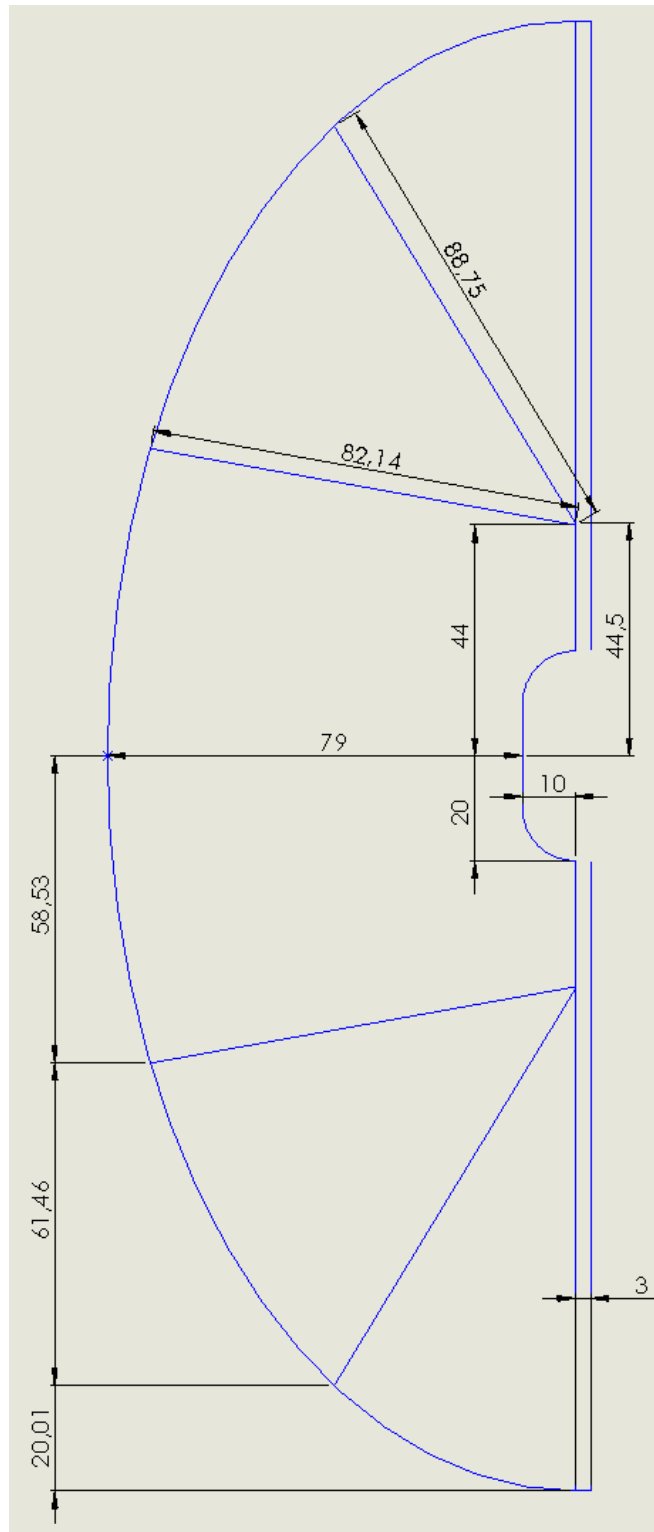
15% bigger than 140mm wings with stiffener and section measurements (mm), not to scale.
